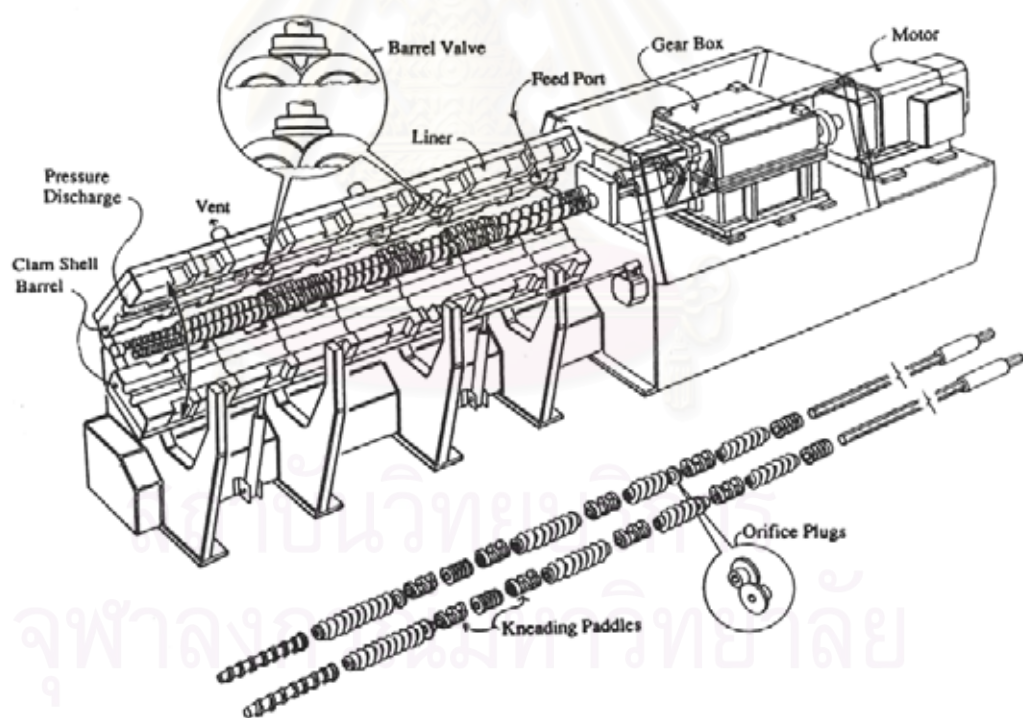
Co-rotating intermeshing twin-screw extruder [Todd, 2000].
